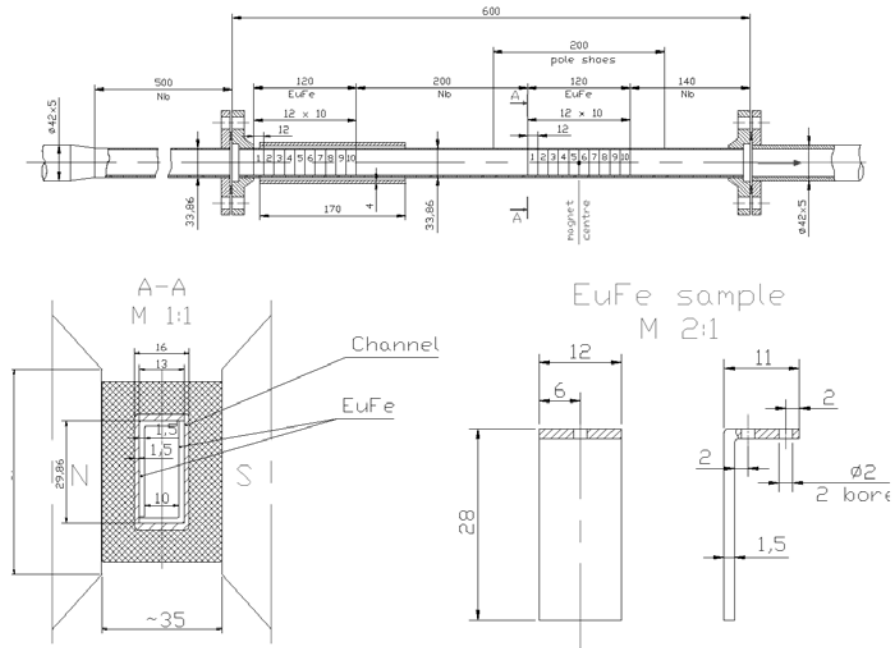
Test section to investigate the corrosion of EUROFER samples in a magnetic field.
